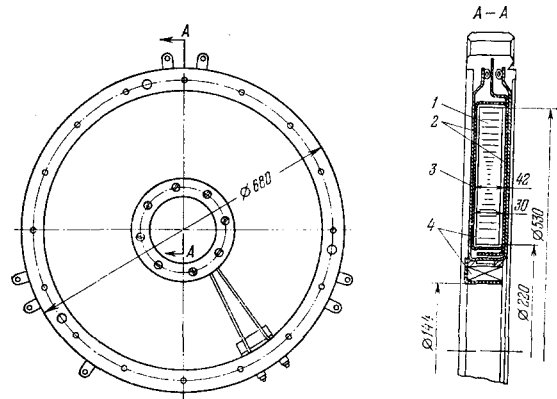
Design of LIA-3000 inductor (dimensions in mm). 1—core, 2—insulating jackets, 3—primary winding, 4—focusing coil.
